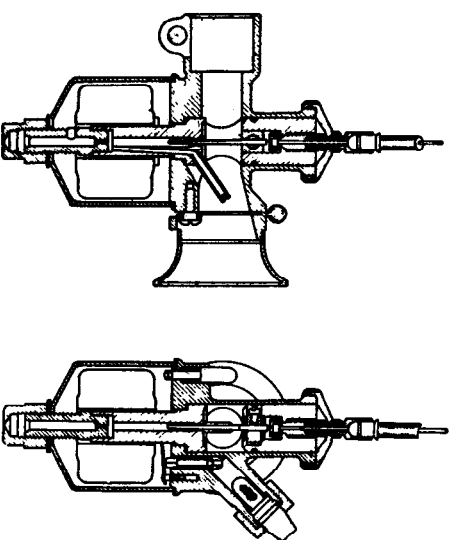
SECTIONAL ARRANGEMENTS OF MIDGET CARBURETTER.
